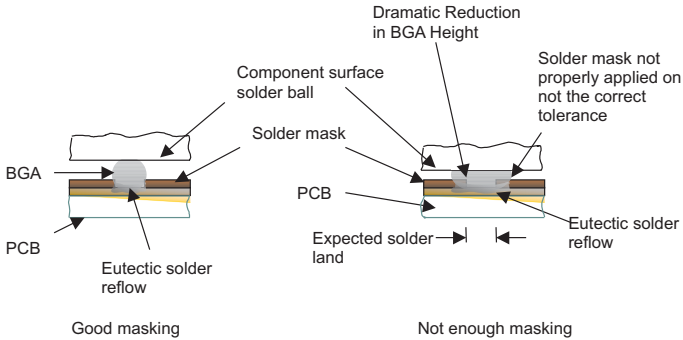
Comparison of proper solder masking on the PCB and when not enough solder mask exists (shown on the right) to properly protect against solder run-off. Here the solder ball height has significantly collapsed.
